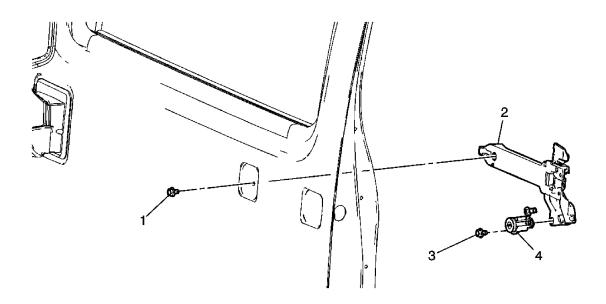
Lock Cylinder Replacement - Door Courtesy of GENERAL MOTORS CORP.
